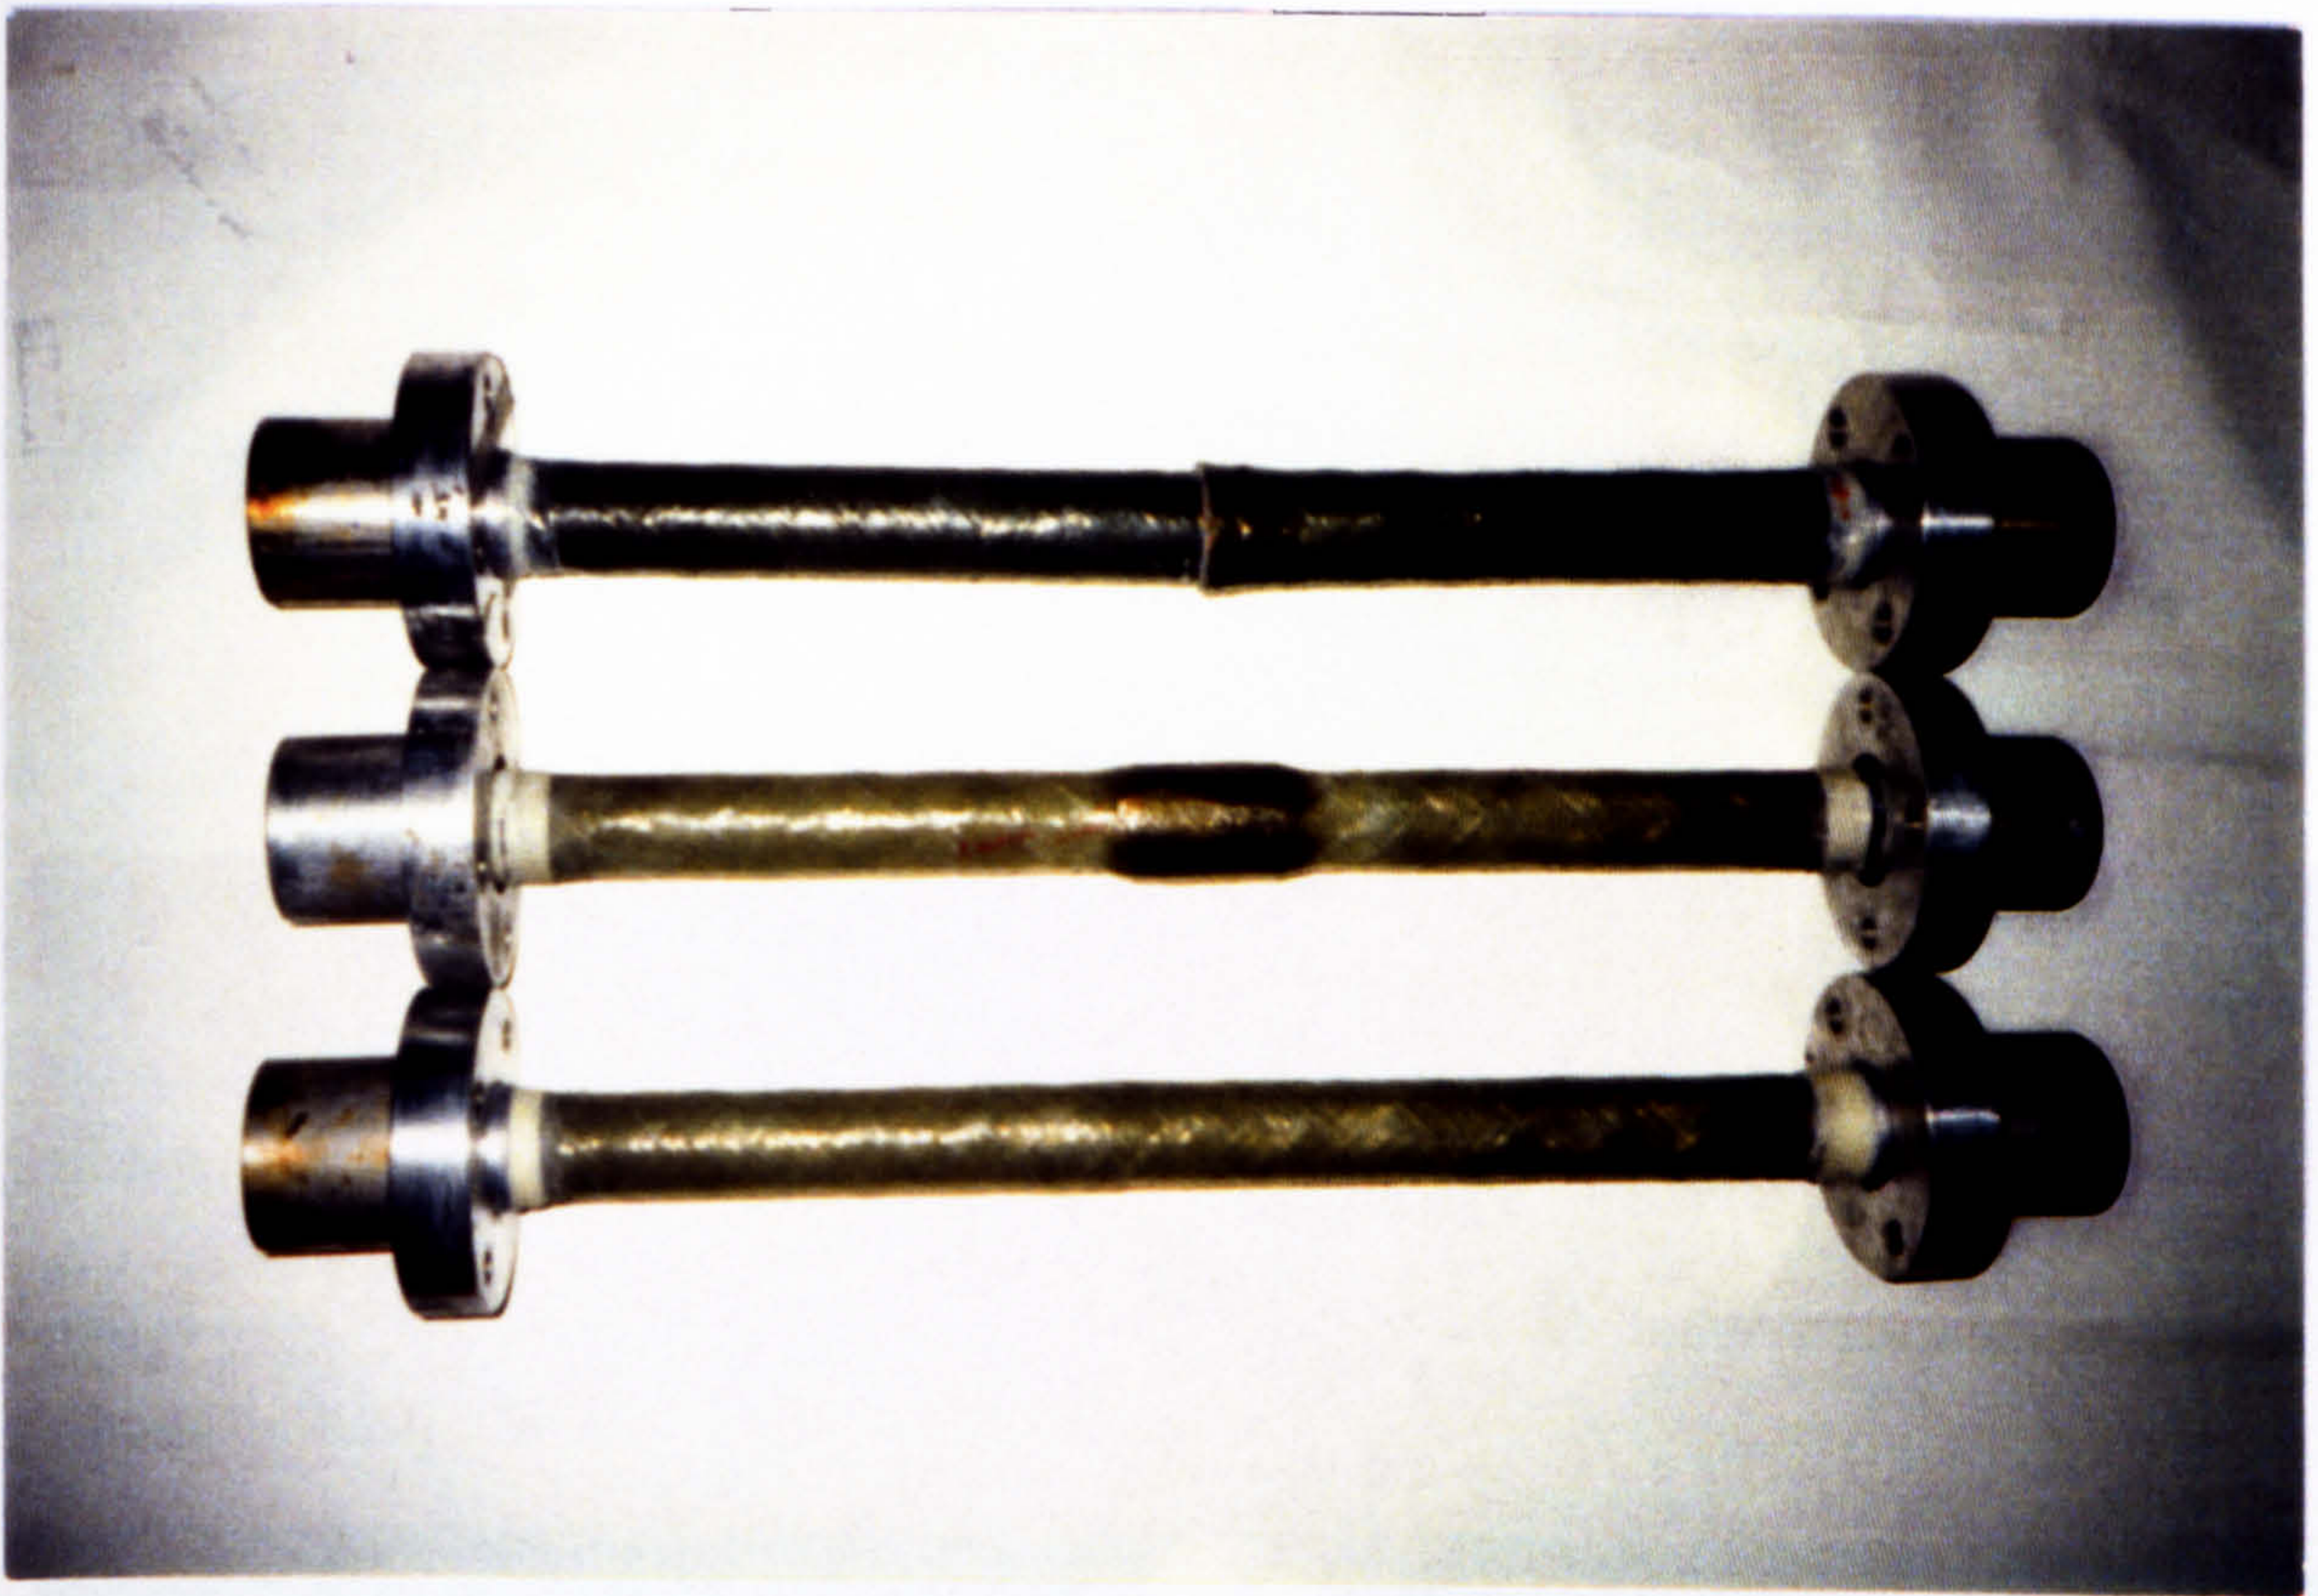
The three types of GRVE specimen equipped with end-caps ready for tests.
